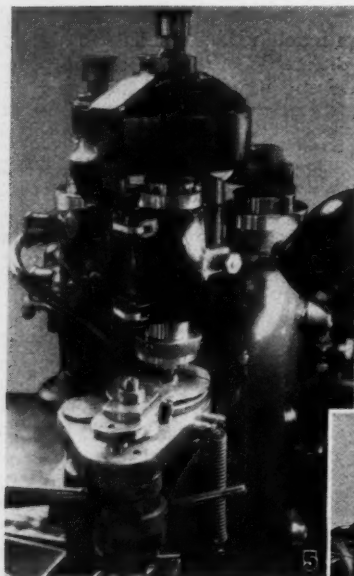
Five surfaces of different heights and diameters are machined in the pillar plate with this machine. Fig. 6—This machine drills 20 holes in the pillar plate, one hole at a time, in less than one minute. Fig. 7—Counterboring holes in the pillar plate.
